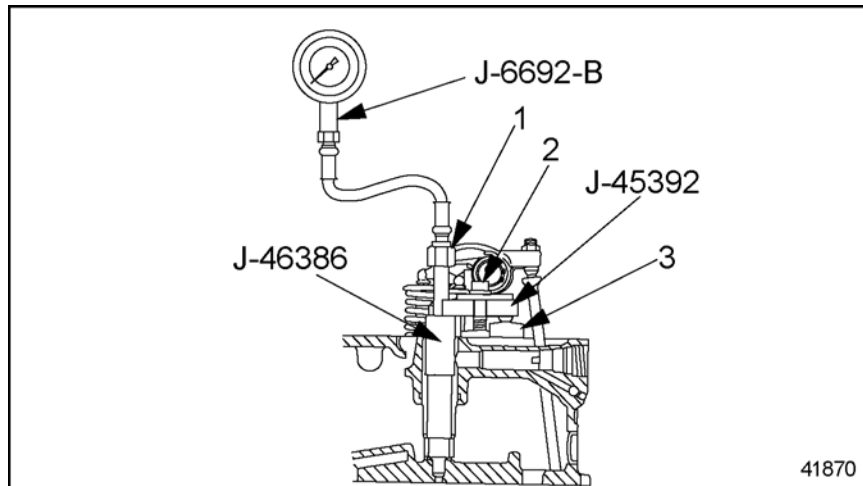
Removing the Fuel Injector Nozzle
